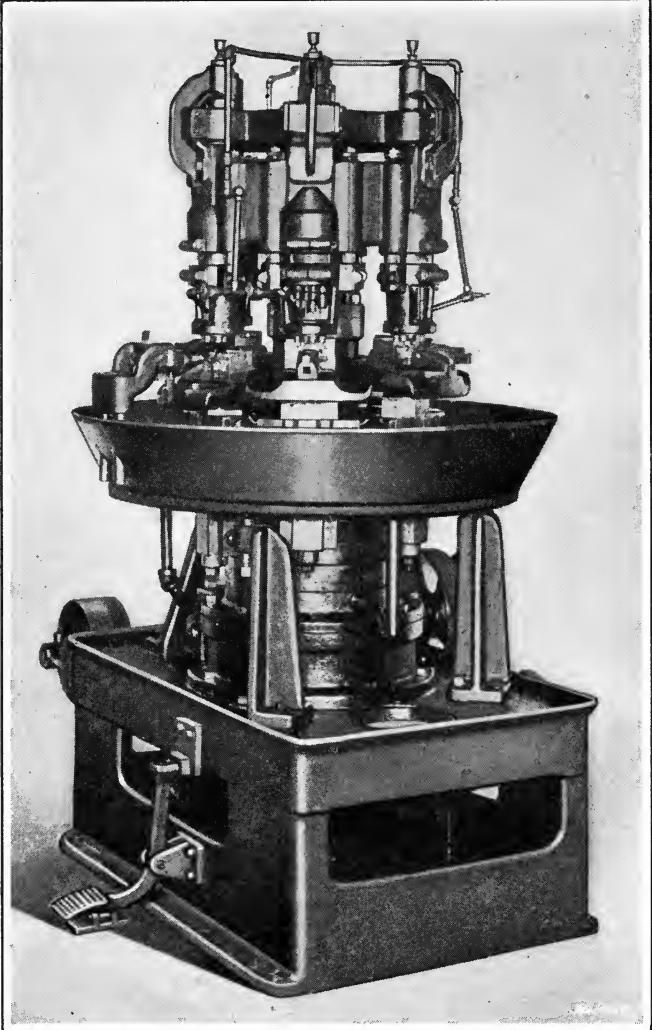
Multiple-head Drilling Machine which provides for Drilling Parts containing practically any Number of Holes without Loss of Time for Ejection of Drilled Pieces or Setting up Undrilled Blanks
